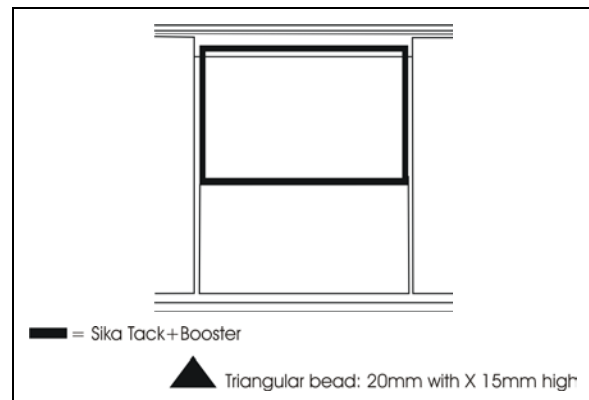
FACE FIXED WINDOW AND HALF-WINDOW – SIKA AKTIVATOR
